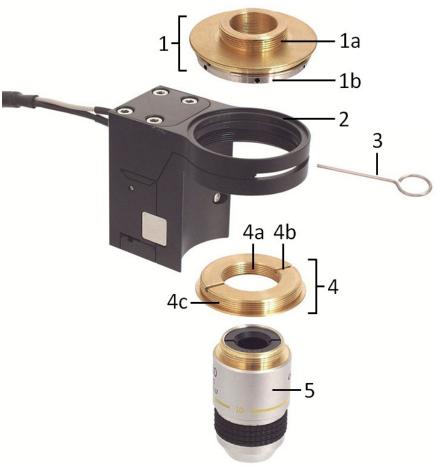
P-721.xxQ thread adapter with PIFOC positioner and microscope objective
